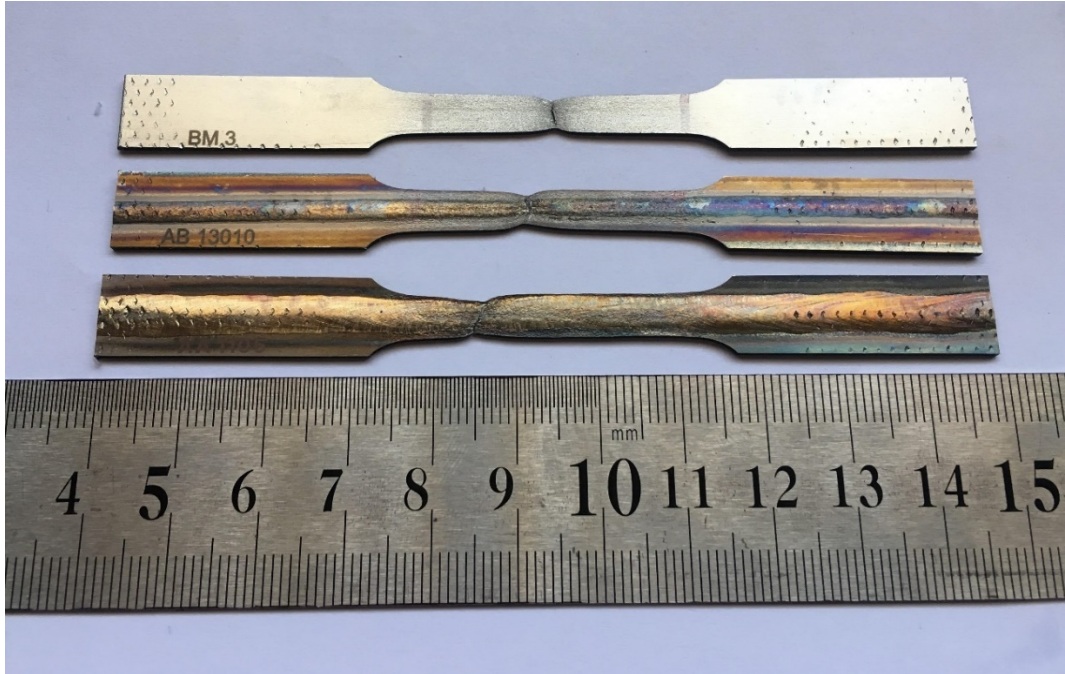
Tensile specimens still attached where base material is present in the gauge width of Grade 441. The top specimen (ID: BM3) indicates the Grade 441 base material, the middle specimen (ID: AB13010, welded at 130A, 10 mm/s welding speed, 20° electrode tip angle and 20Hz pulse frequency) illustrates a 50% weld metal in the gauge width and the bottom specimen indicates a 100% weld metal in the gauge width (ID: AA1105, welded at 110A, 5 mm/s welding speed, 20° electrode tip angle and 15Hz pulse frequency)
